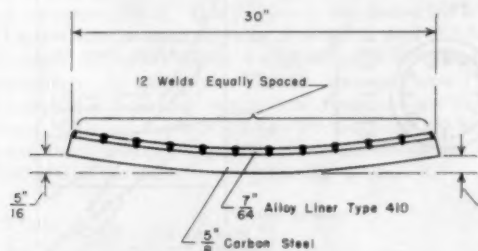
LINED PLATE WITH WELDS ON $2\frac{1}{8}$ -IN. CENTERS
